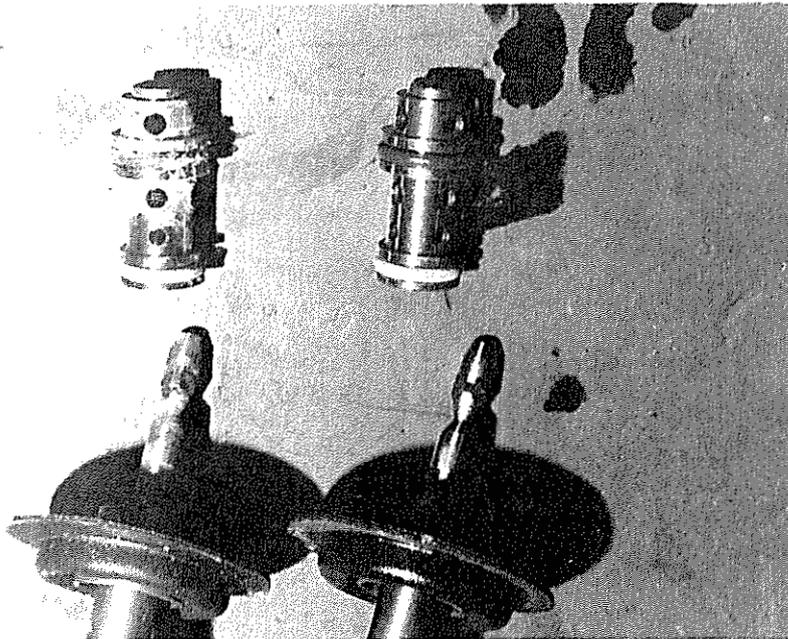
Bypass valve and sleeve assemblies of left and right engine FCUs. The left engine components show considerable rusting and deposits. The gelatinous deposit on the left engine sleeve assembly has dried to a white powdery material.
